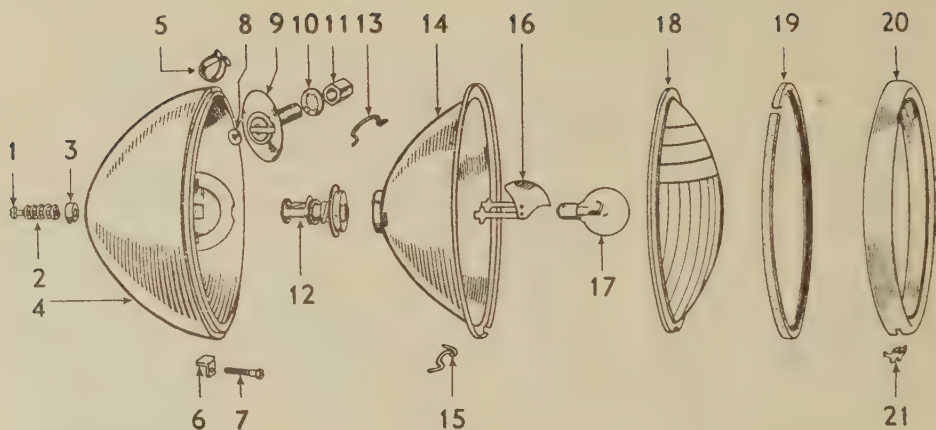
C.A.V. Headlamp in Exploded View (Bedford Vehicles).
